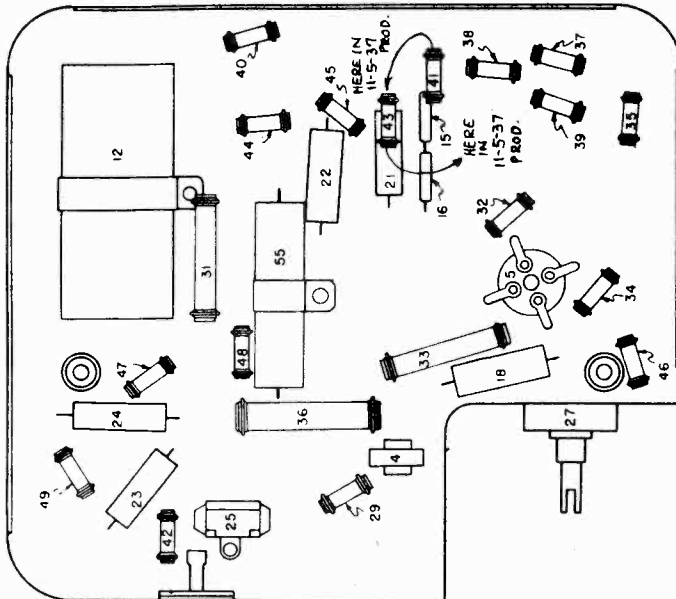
PARTS LAYOUT - BOTTOM VIEW
